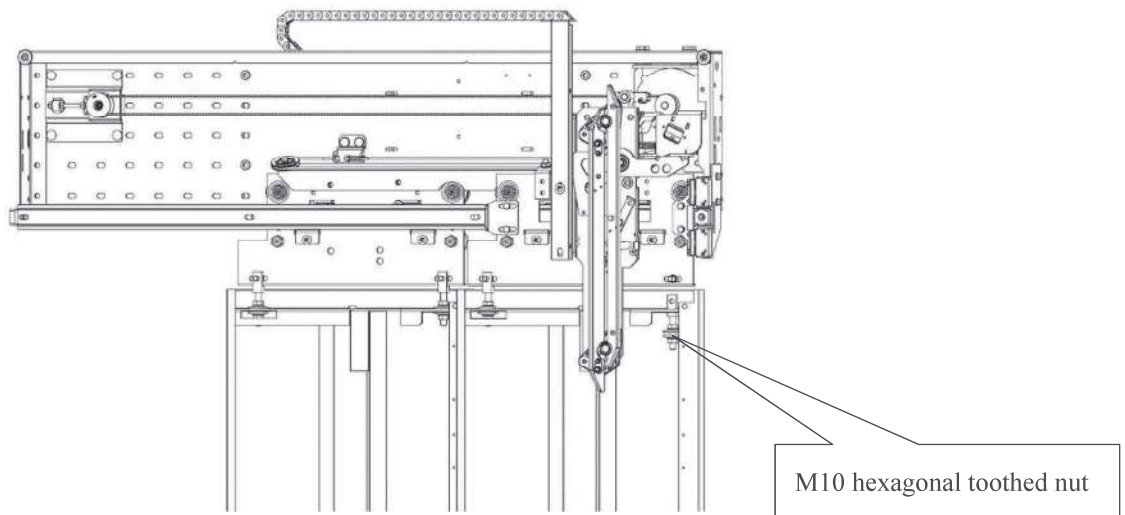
Adjustment of vertical and horizontal positions of the car door panels
